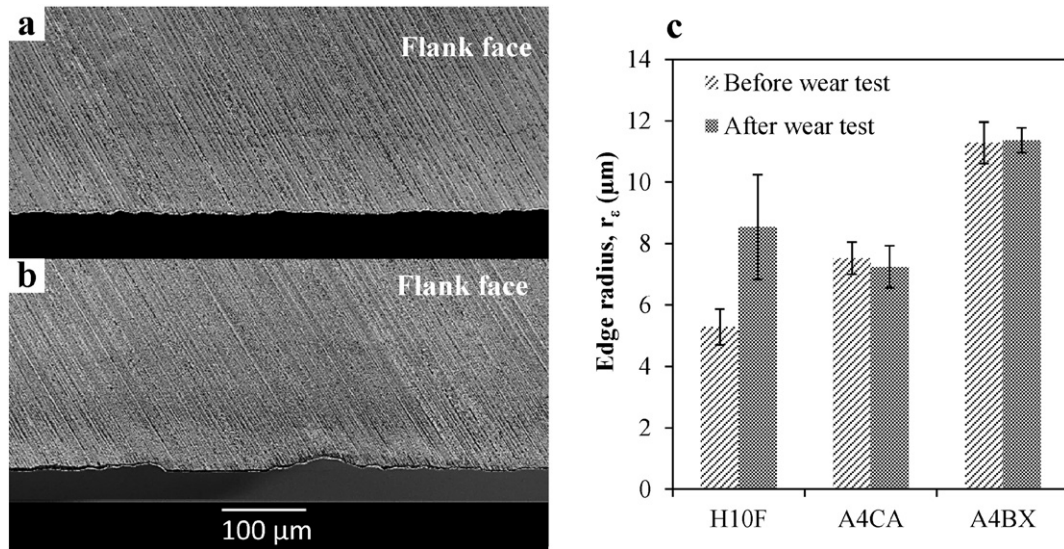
a) SEM micrographs of the active zone of the H10F cutting edge before wear test and b) after wear test. c) Cutting edge radius values of the milling tools before and after the wear test.
